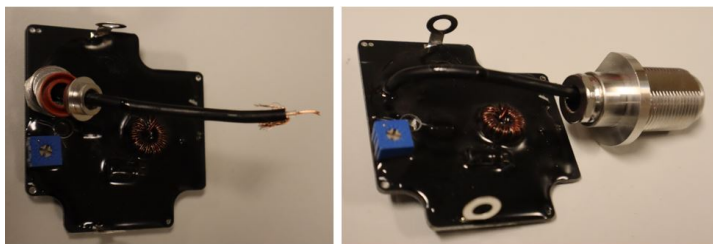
Drilled a hole in the pre-amplifier housing for mounting the N connector.
